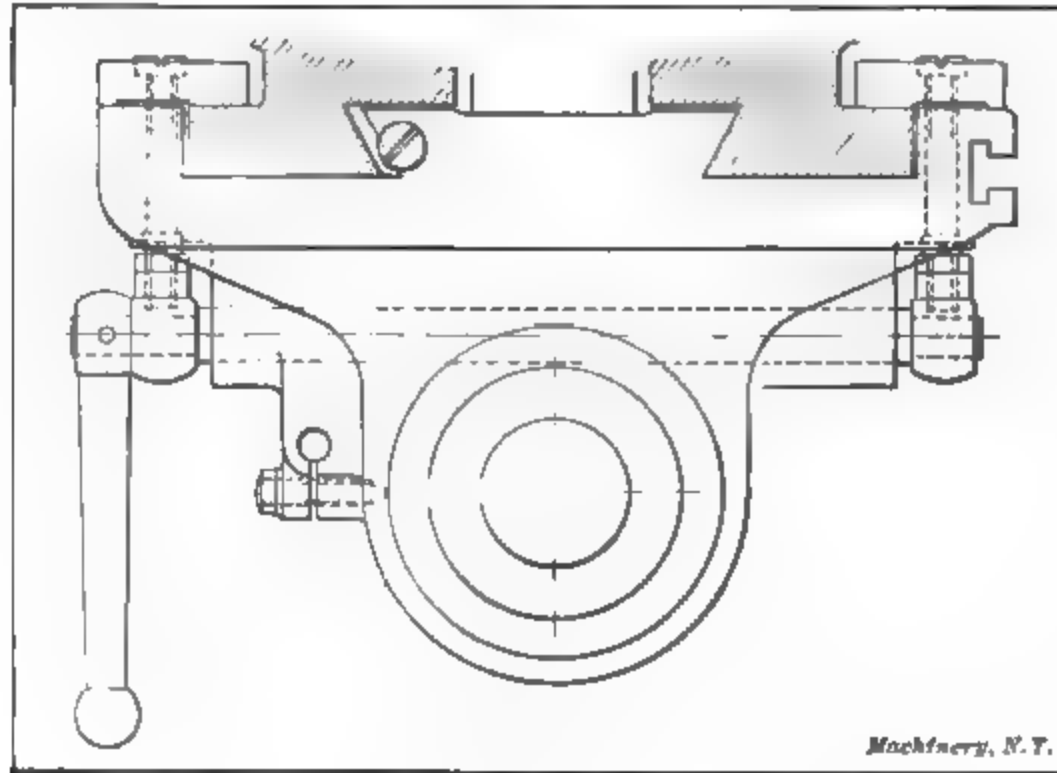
Eccentric Clamping Arrangement for Vertical Milling Machine Head
